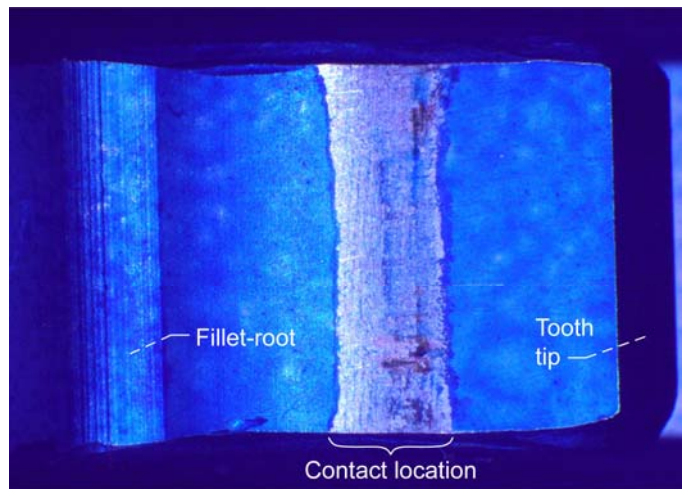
Test tooth contact pattern illustrating evidence of uniform load distribution across the face width.
